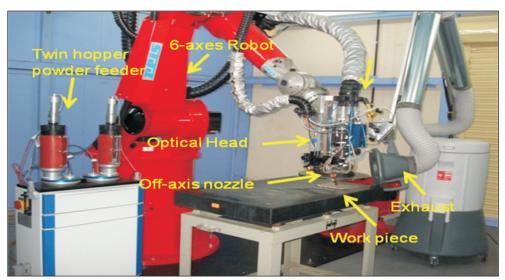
A photograph showing Robot with laser optic head and powder feeding system for laser direct metal deposition available at ARCI.
